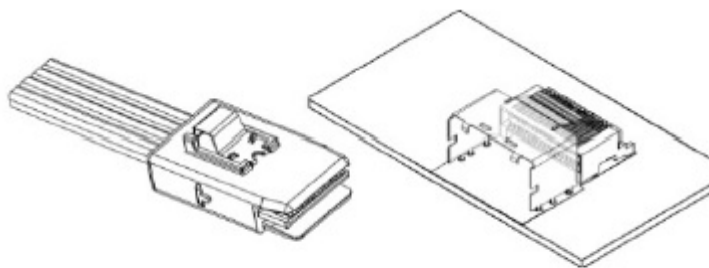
HSDL cable and locked connector assembly (fixed end) on circuit board
